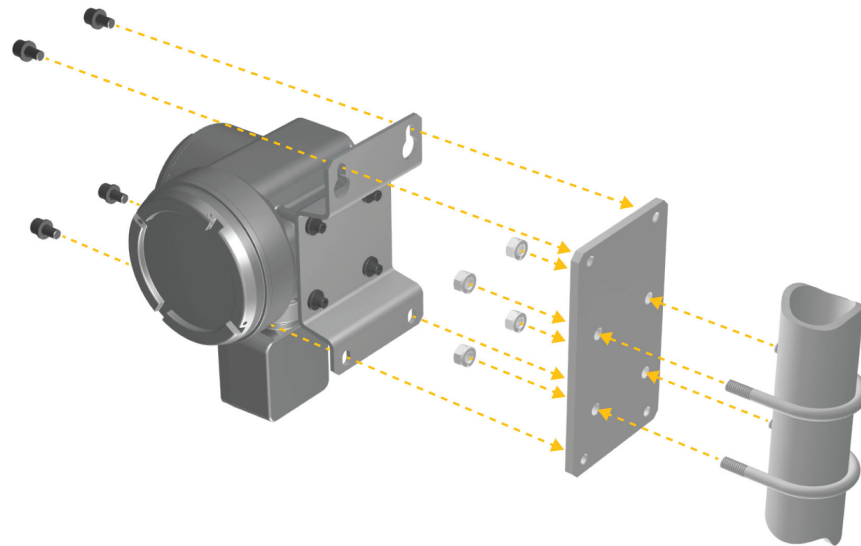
Pole-mounting bracket attachment for a stainless steel transmitter
